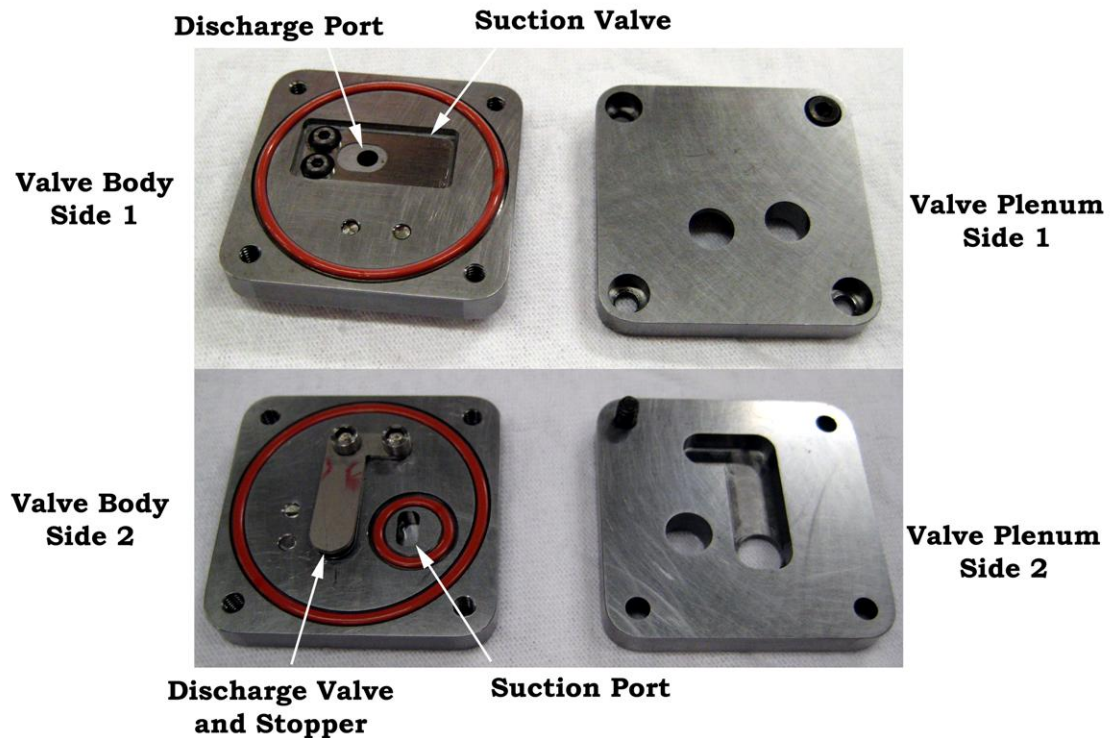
Photos of reed valve assembly used in compressor prototype.
